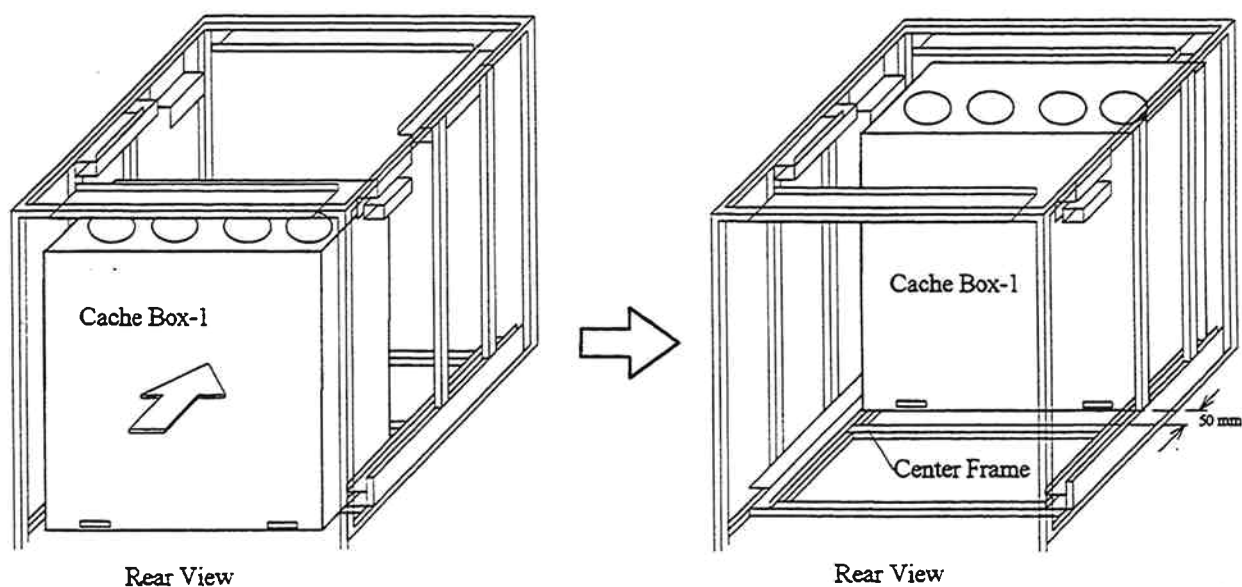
Attachment of the Cable Box-1
